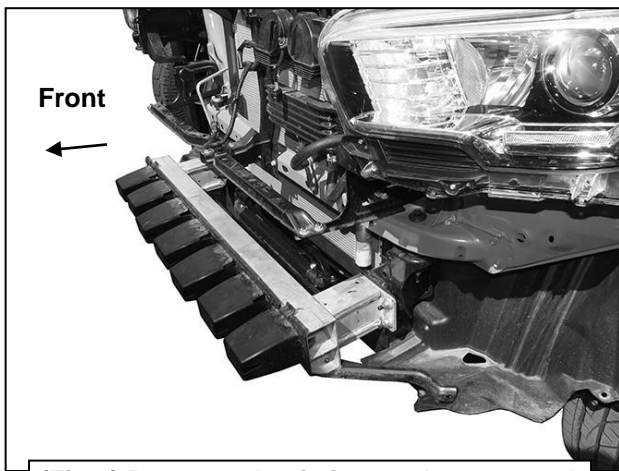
Remove grille, air dam from below bumper and license plate. Remove plastic bumper cover
